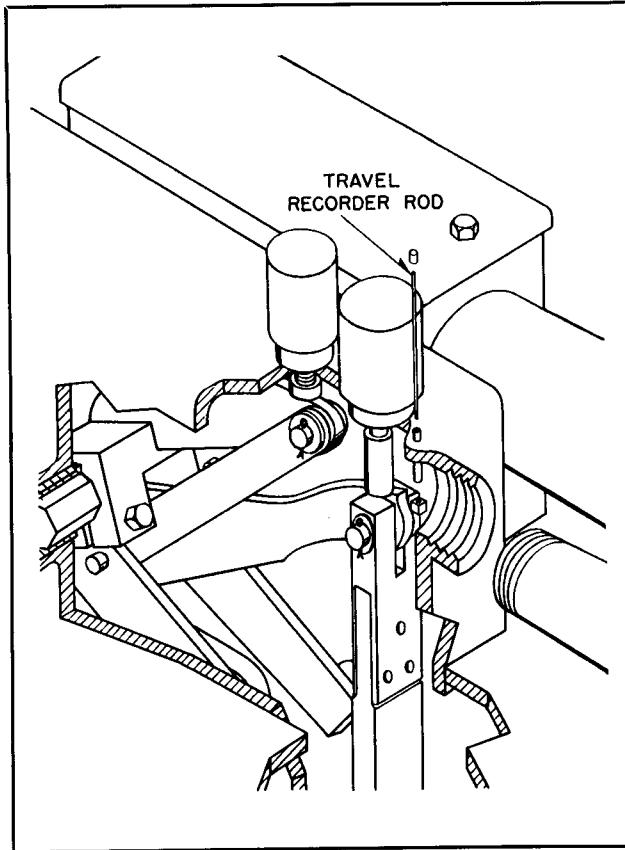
Inserting Travel Recorder Rod Through Pole Unit Mechanism Housing
